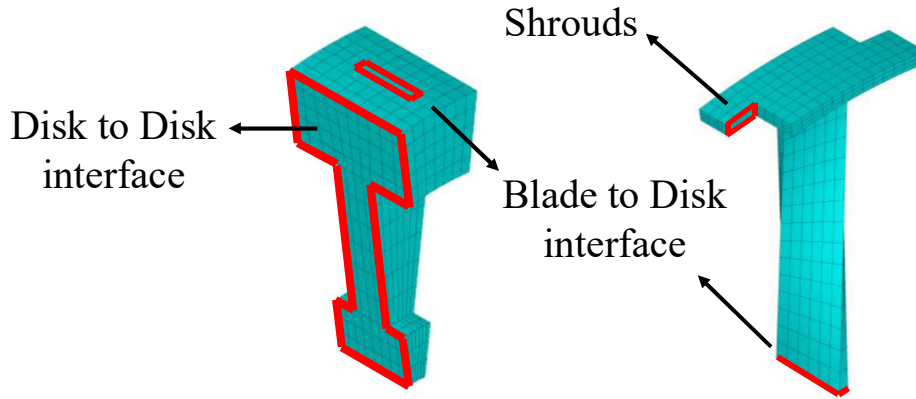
Disk to disk, shrouds, and blade to disk interface of the bladed disk assembly
